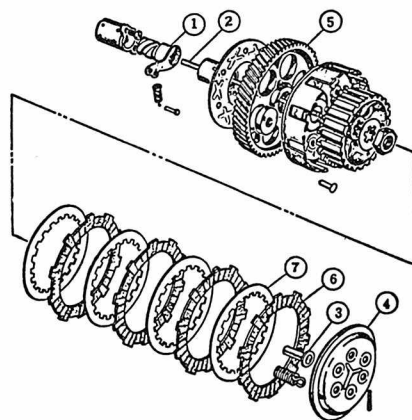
Exploded view of 80 cc clutch assembly. Refer to Fig. S1-34 for installation drawing.
